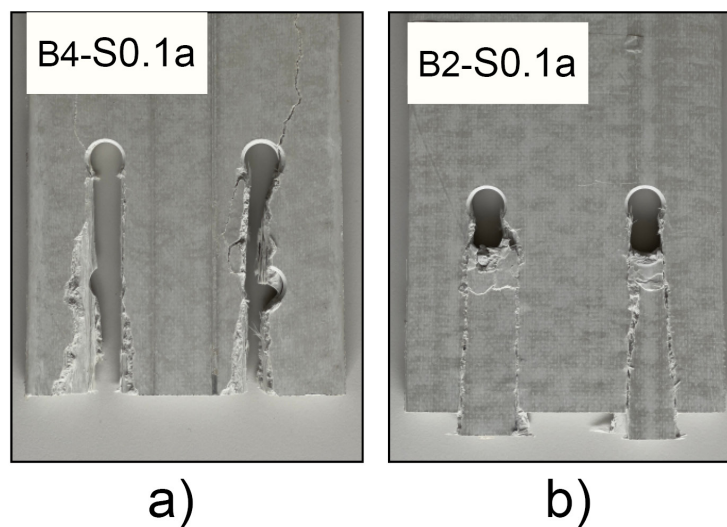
Combined crushing and shear-out failure modes of bolted joints under monotonic loading, a) B4-S0.1a, b) B2-S0.1a.
